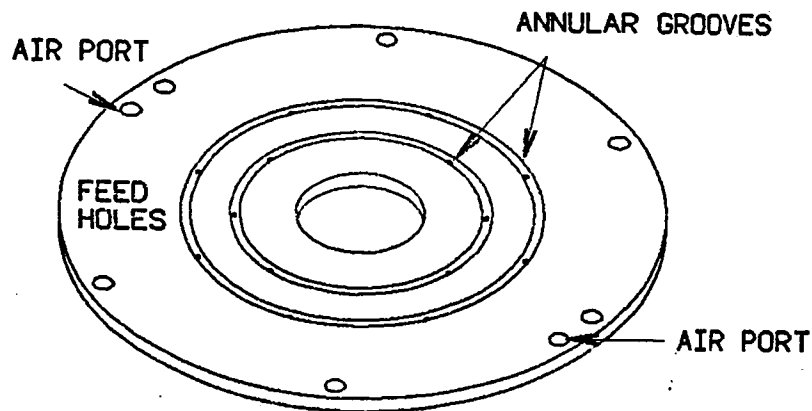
Double Grooved Annular Air Bearing Surface and multiple feed holes (See Figure 21). This type of bearing is the most resistant to tilting.²⁰
